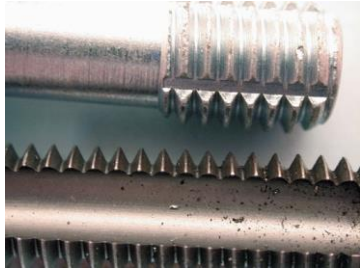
Deburring all sharp edges is an important step to achieve proper engine assembly.
